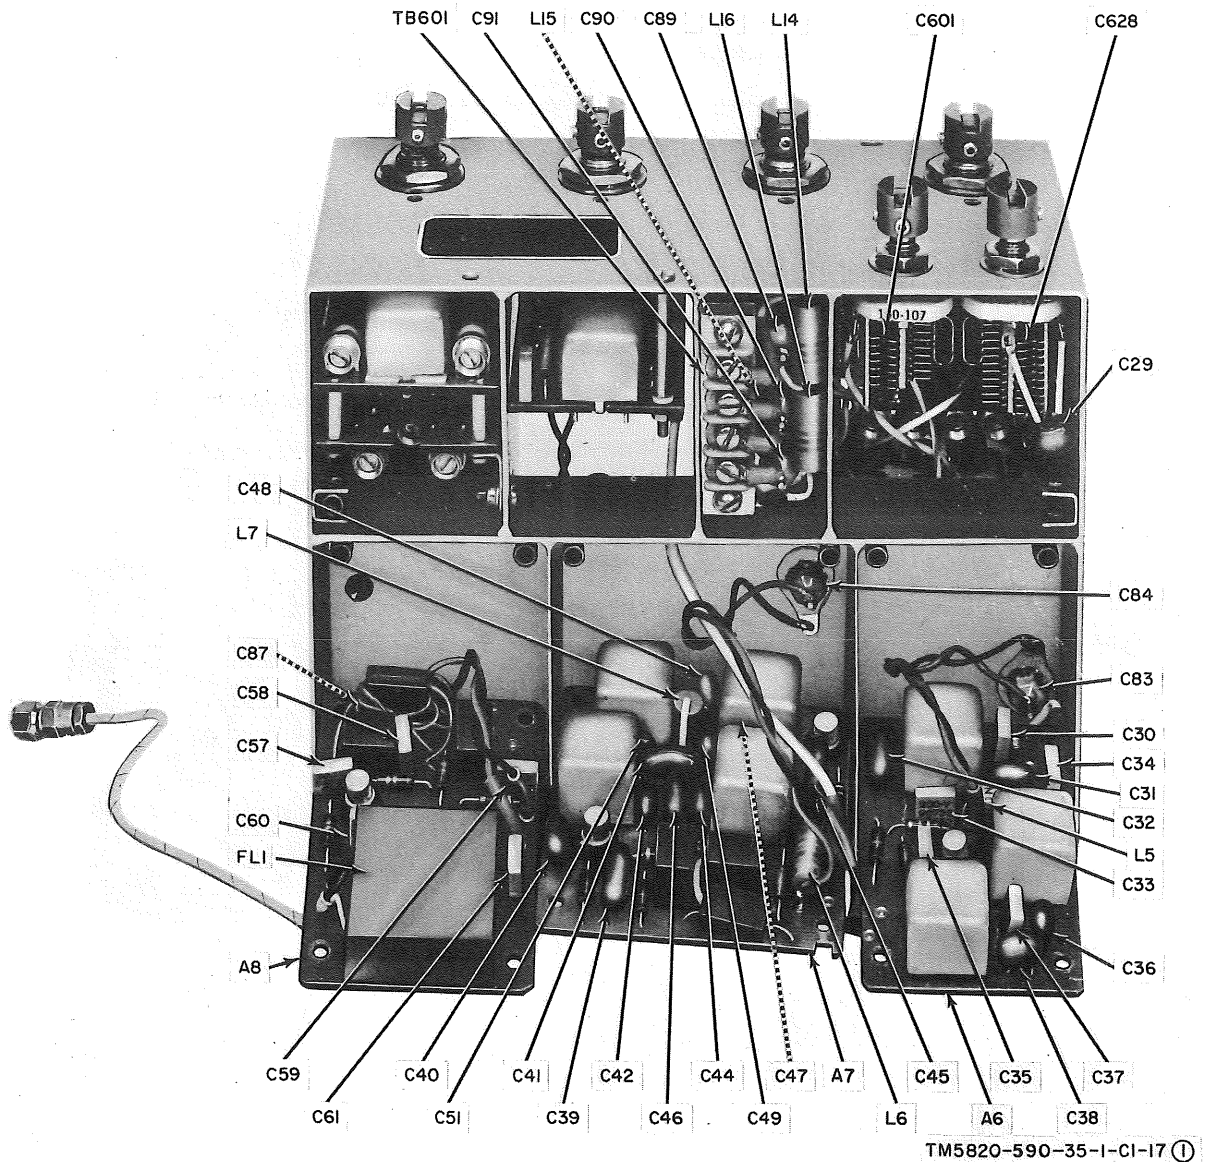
①. Frequency synthesizer module, bottom view, circuit boards removed
